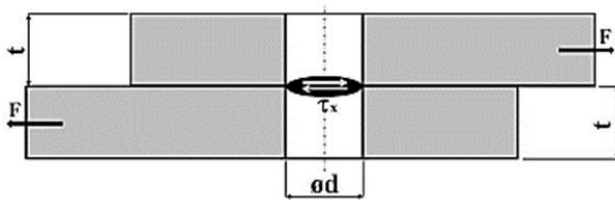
Joints lap configuration of FSSW specimen for tensile shear test.
